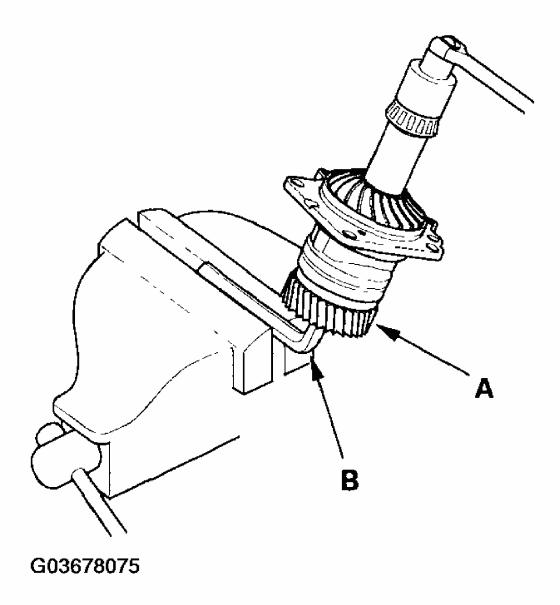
Loosening Locknut Courtesy of AMERICAN HONDA MOTOR CO., INC.
